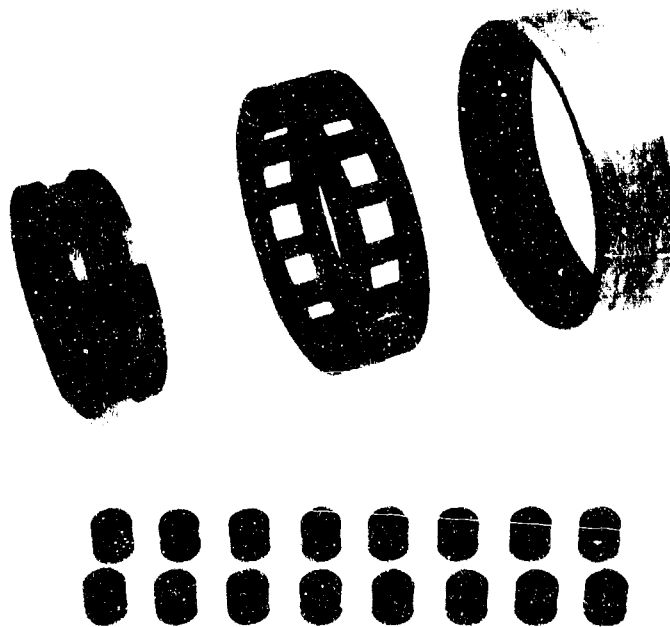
Rig F35138, Build 2 Post-Test View of Front Bearing Showing Good Condition of Detail Parts FF 97190
